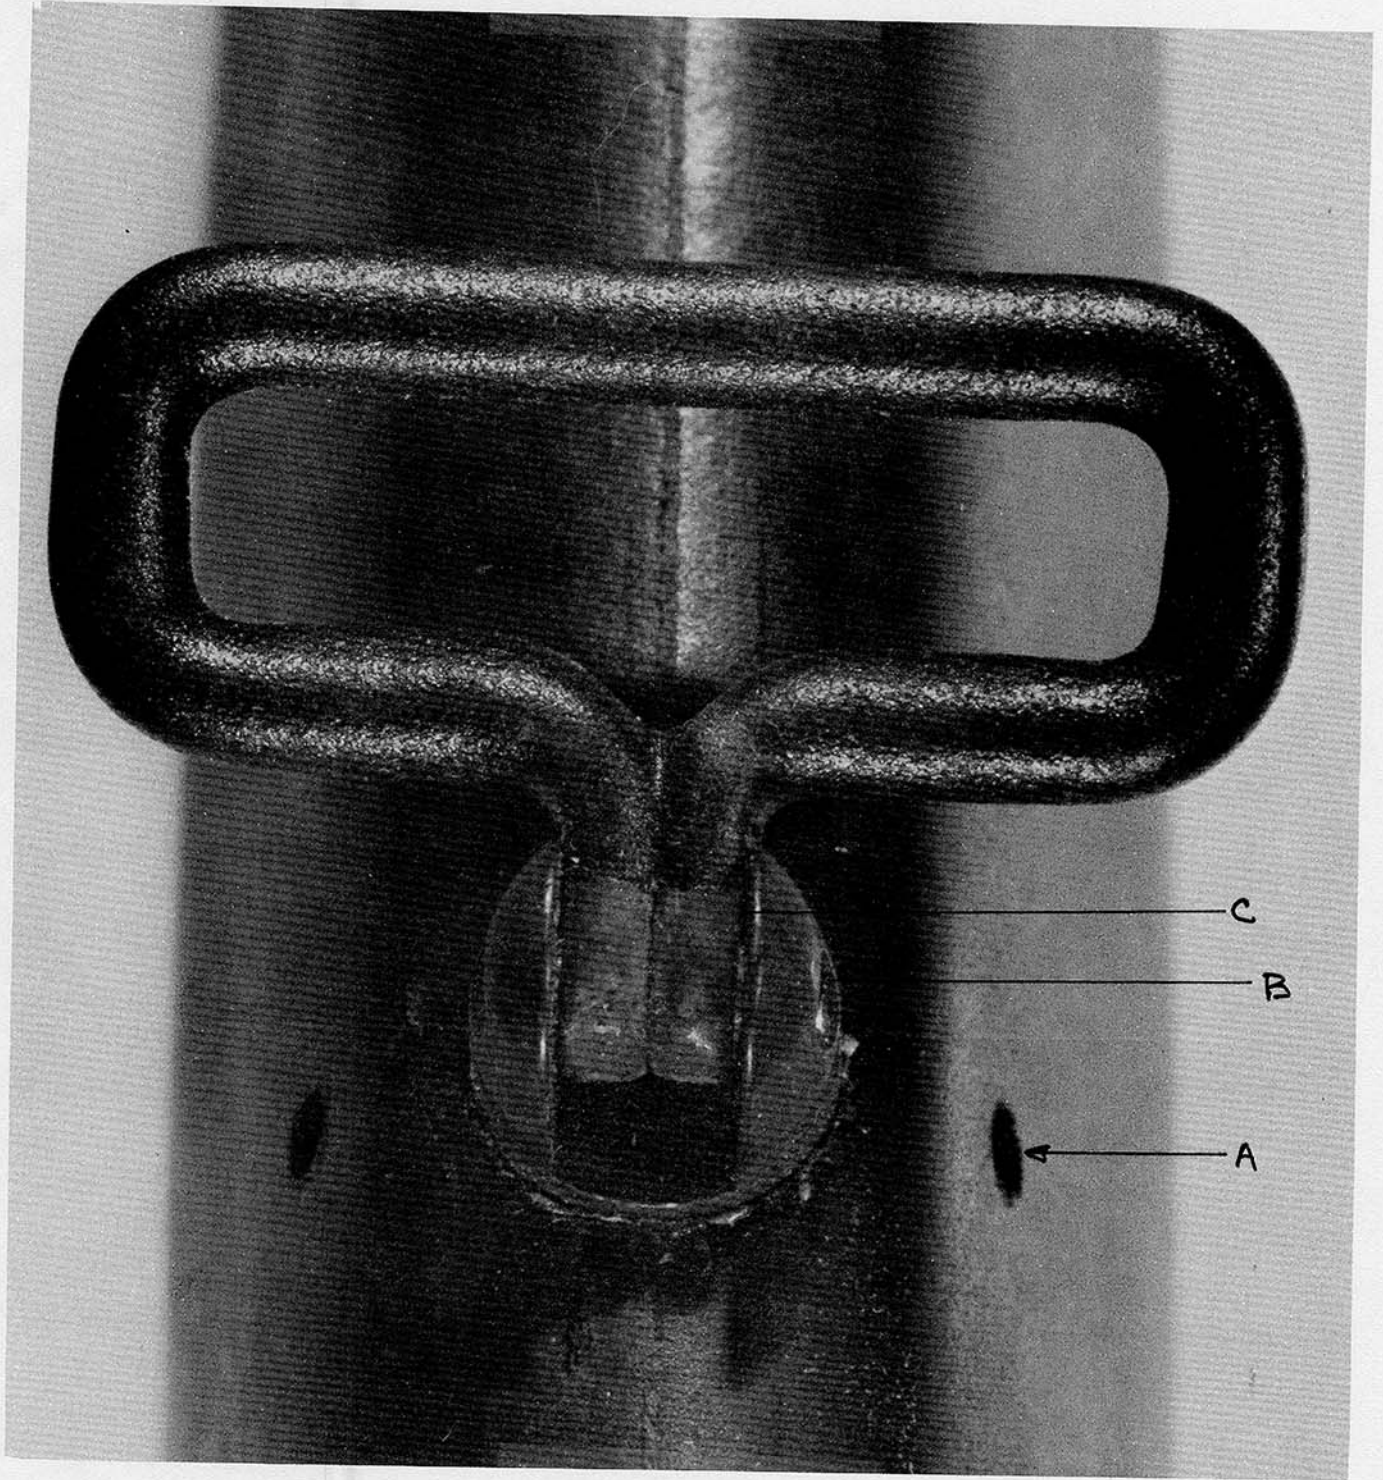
Old style stock assembly (NSN 1005-00-017-9549) showing sling swivel assembly.
